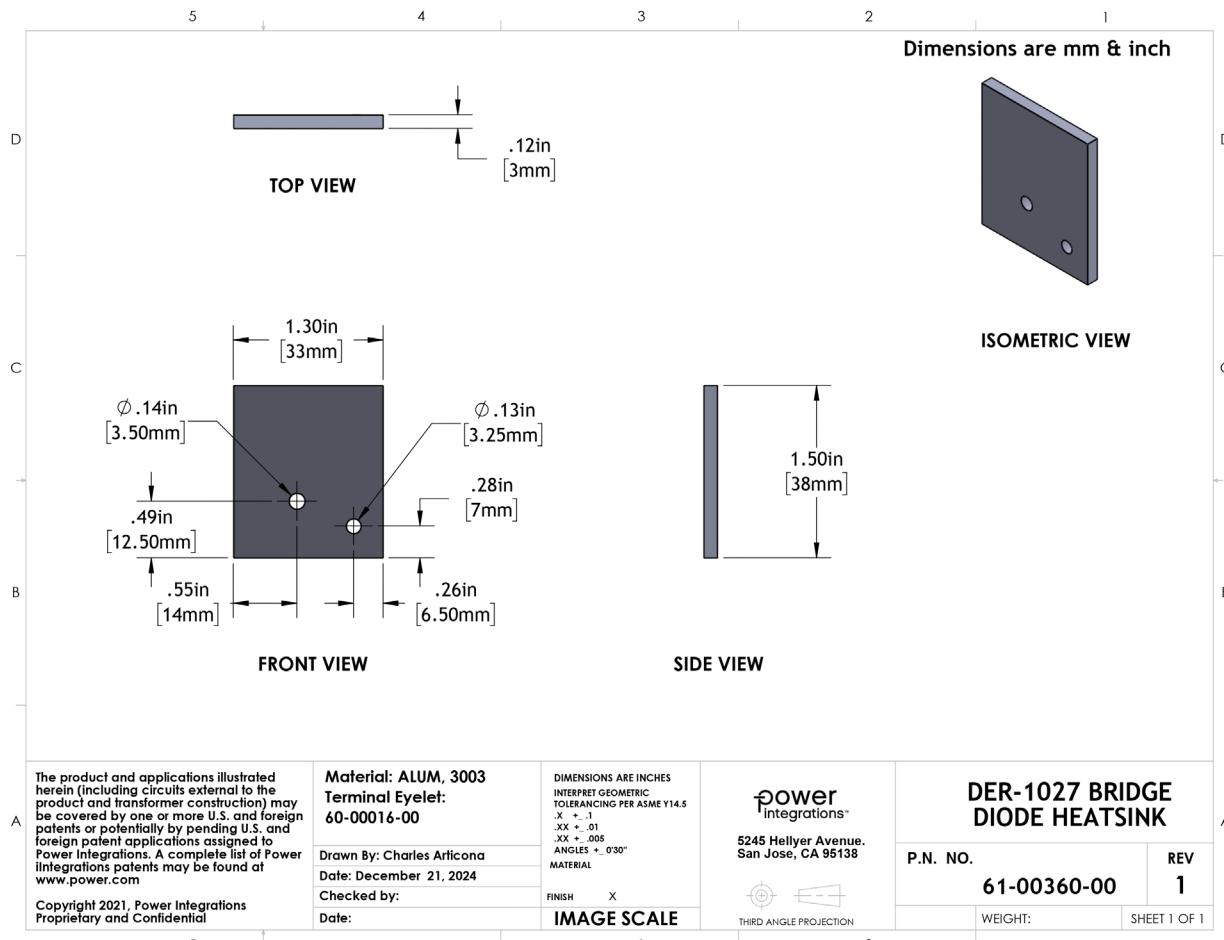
DER1027 TinySwitch-5 Heat Sink Assembly.
